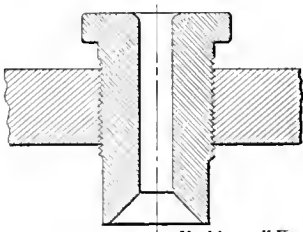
Screw Bushing used for Locating Round Work by means of a Conical Recess.
